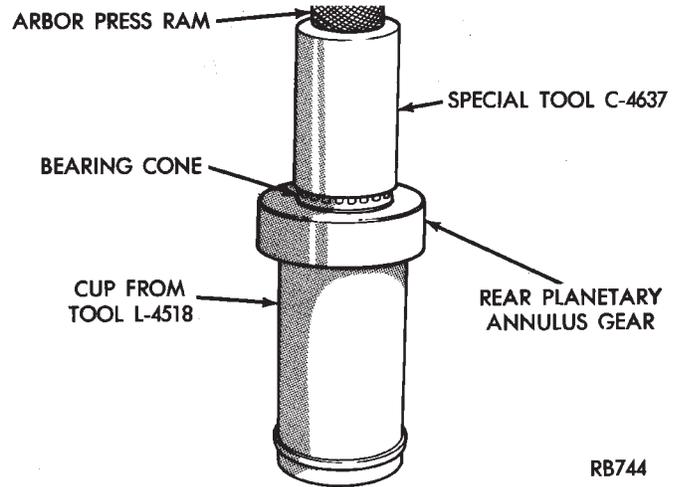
Remove Output Shaft Gear Bearing Cone
